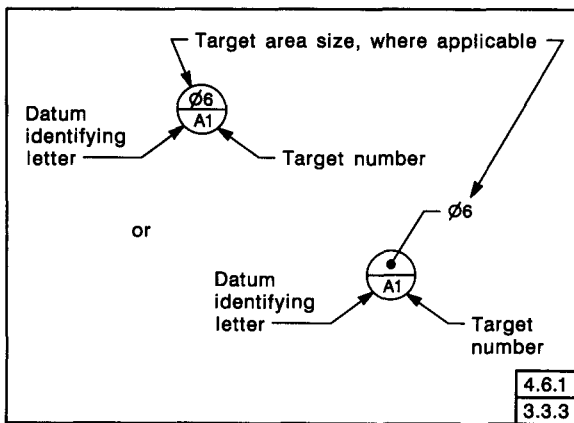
DATUM TARGET SYMBOL
